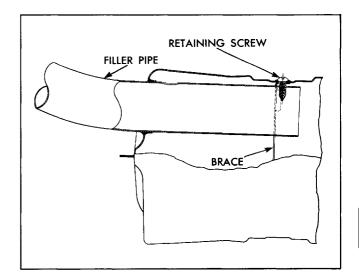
Filler Pipe Installation in Fuel Tank
